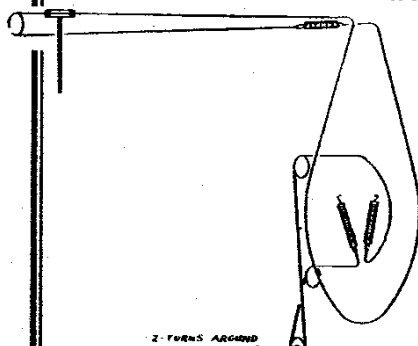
TUNING DRIVE CORD ARRANGEMENT
